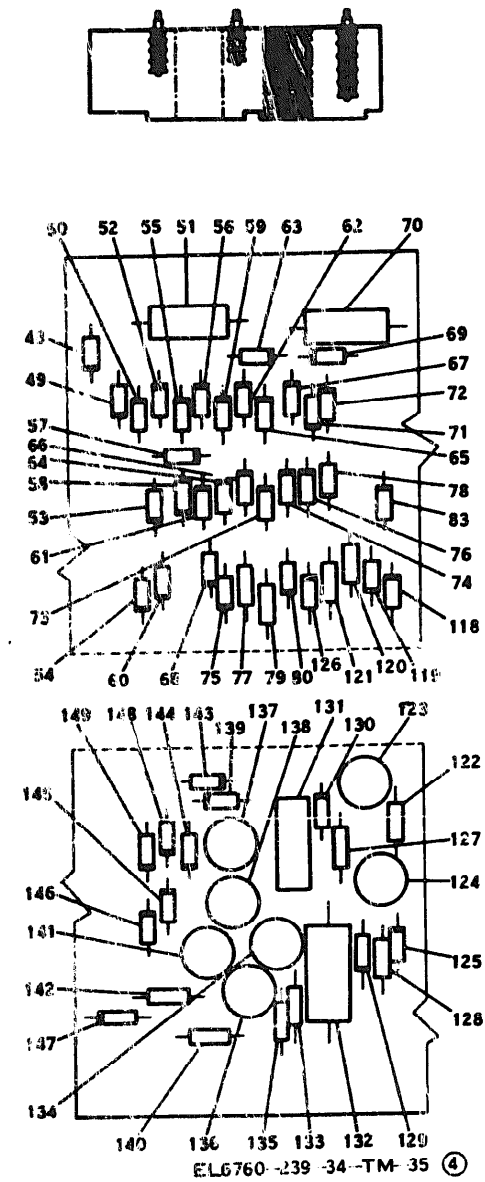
(4). Printed circuit board and component assembly A16. parts location (sheet 4 of 5).
